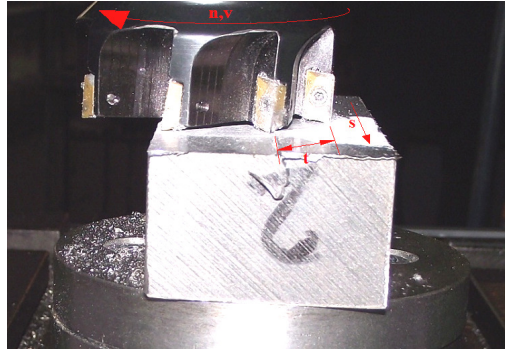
Processing by asymmetrical cut-up face milling with contact angle  $\Psi < 90^\circ$ .
